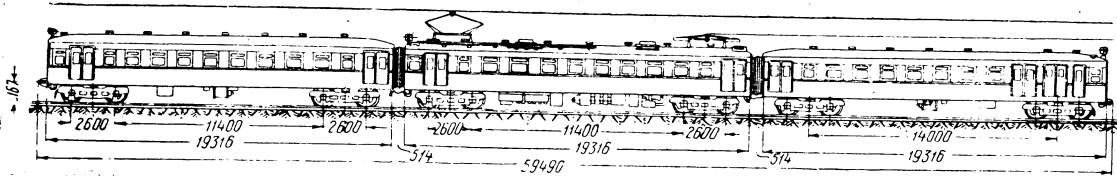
Basic dimensions of three-car unit with "Sr" motor-car.
